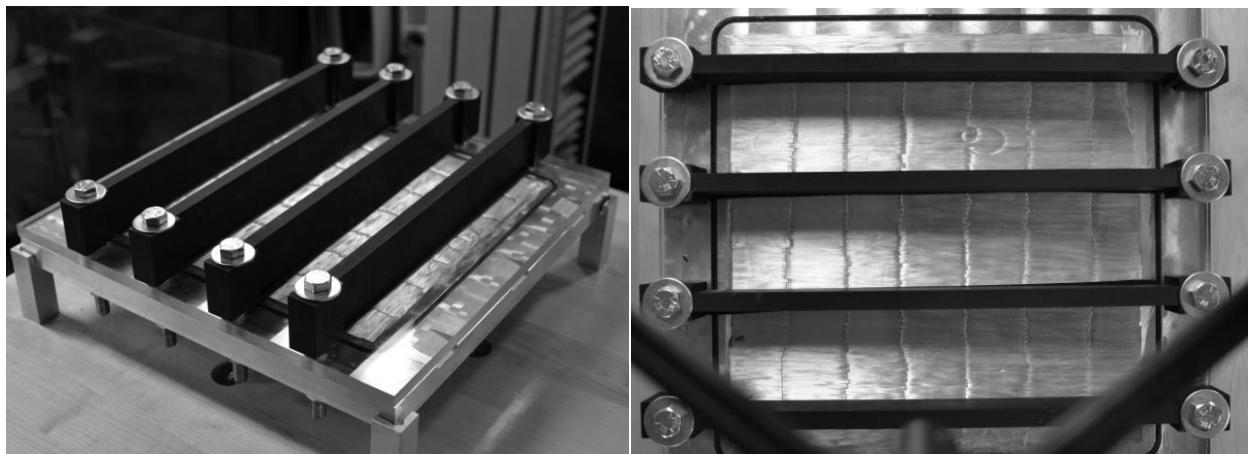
Closed mould: isometric view (left) and top view (right)
